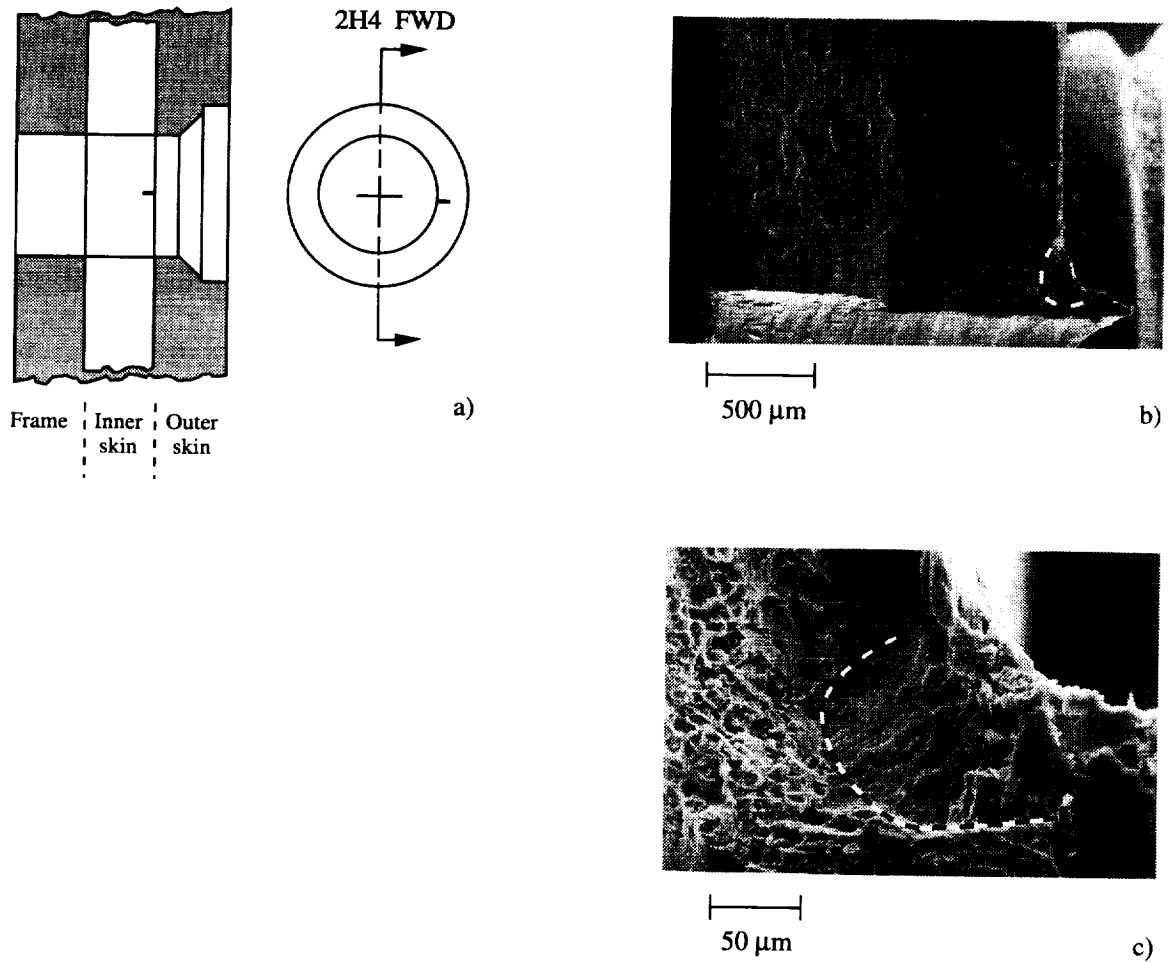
a) The schematic shows the rivet hole 2H4 configuration and the location of the inner skin fatigue crack oriented in the forward direction and about the 3 o'clock position. b) The SEM micrograph shows a small fatigue crack located near a rivet hole corner burr. The dashed line marks the fatigue crack front. c) The SEM micrograph shows the small fatigue crack at high magnification.
